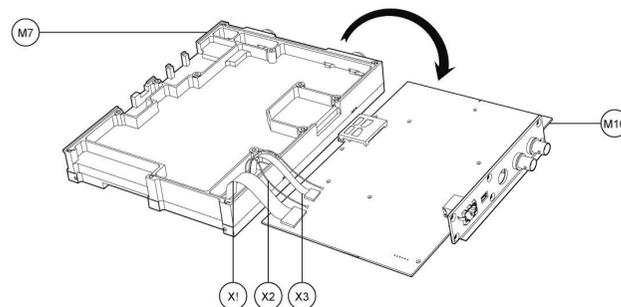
Replace MAINBOARD-RF FLAT CABLE 26P, MAINBOARD-RF CABLE 12P, COAX CABLE
